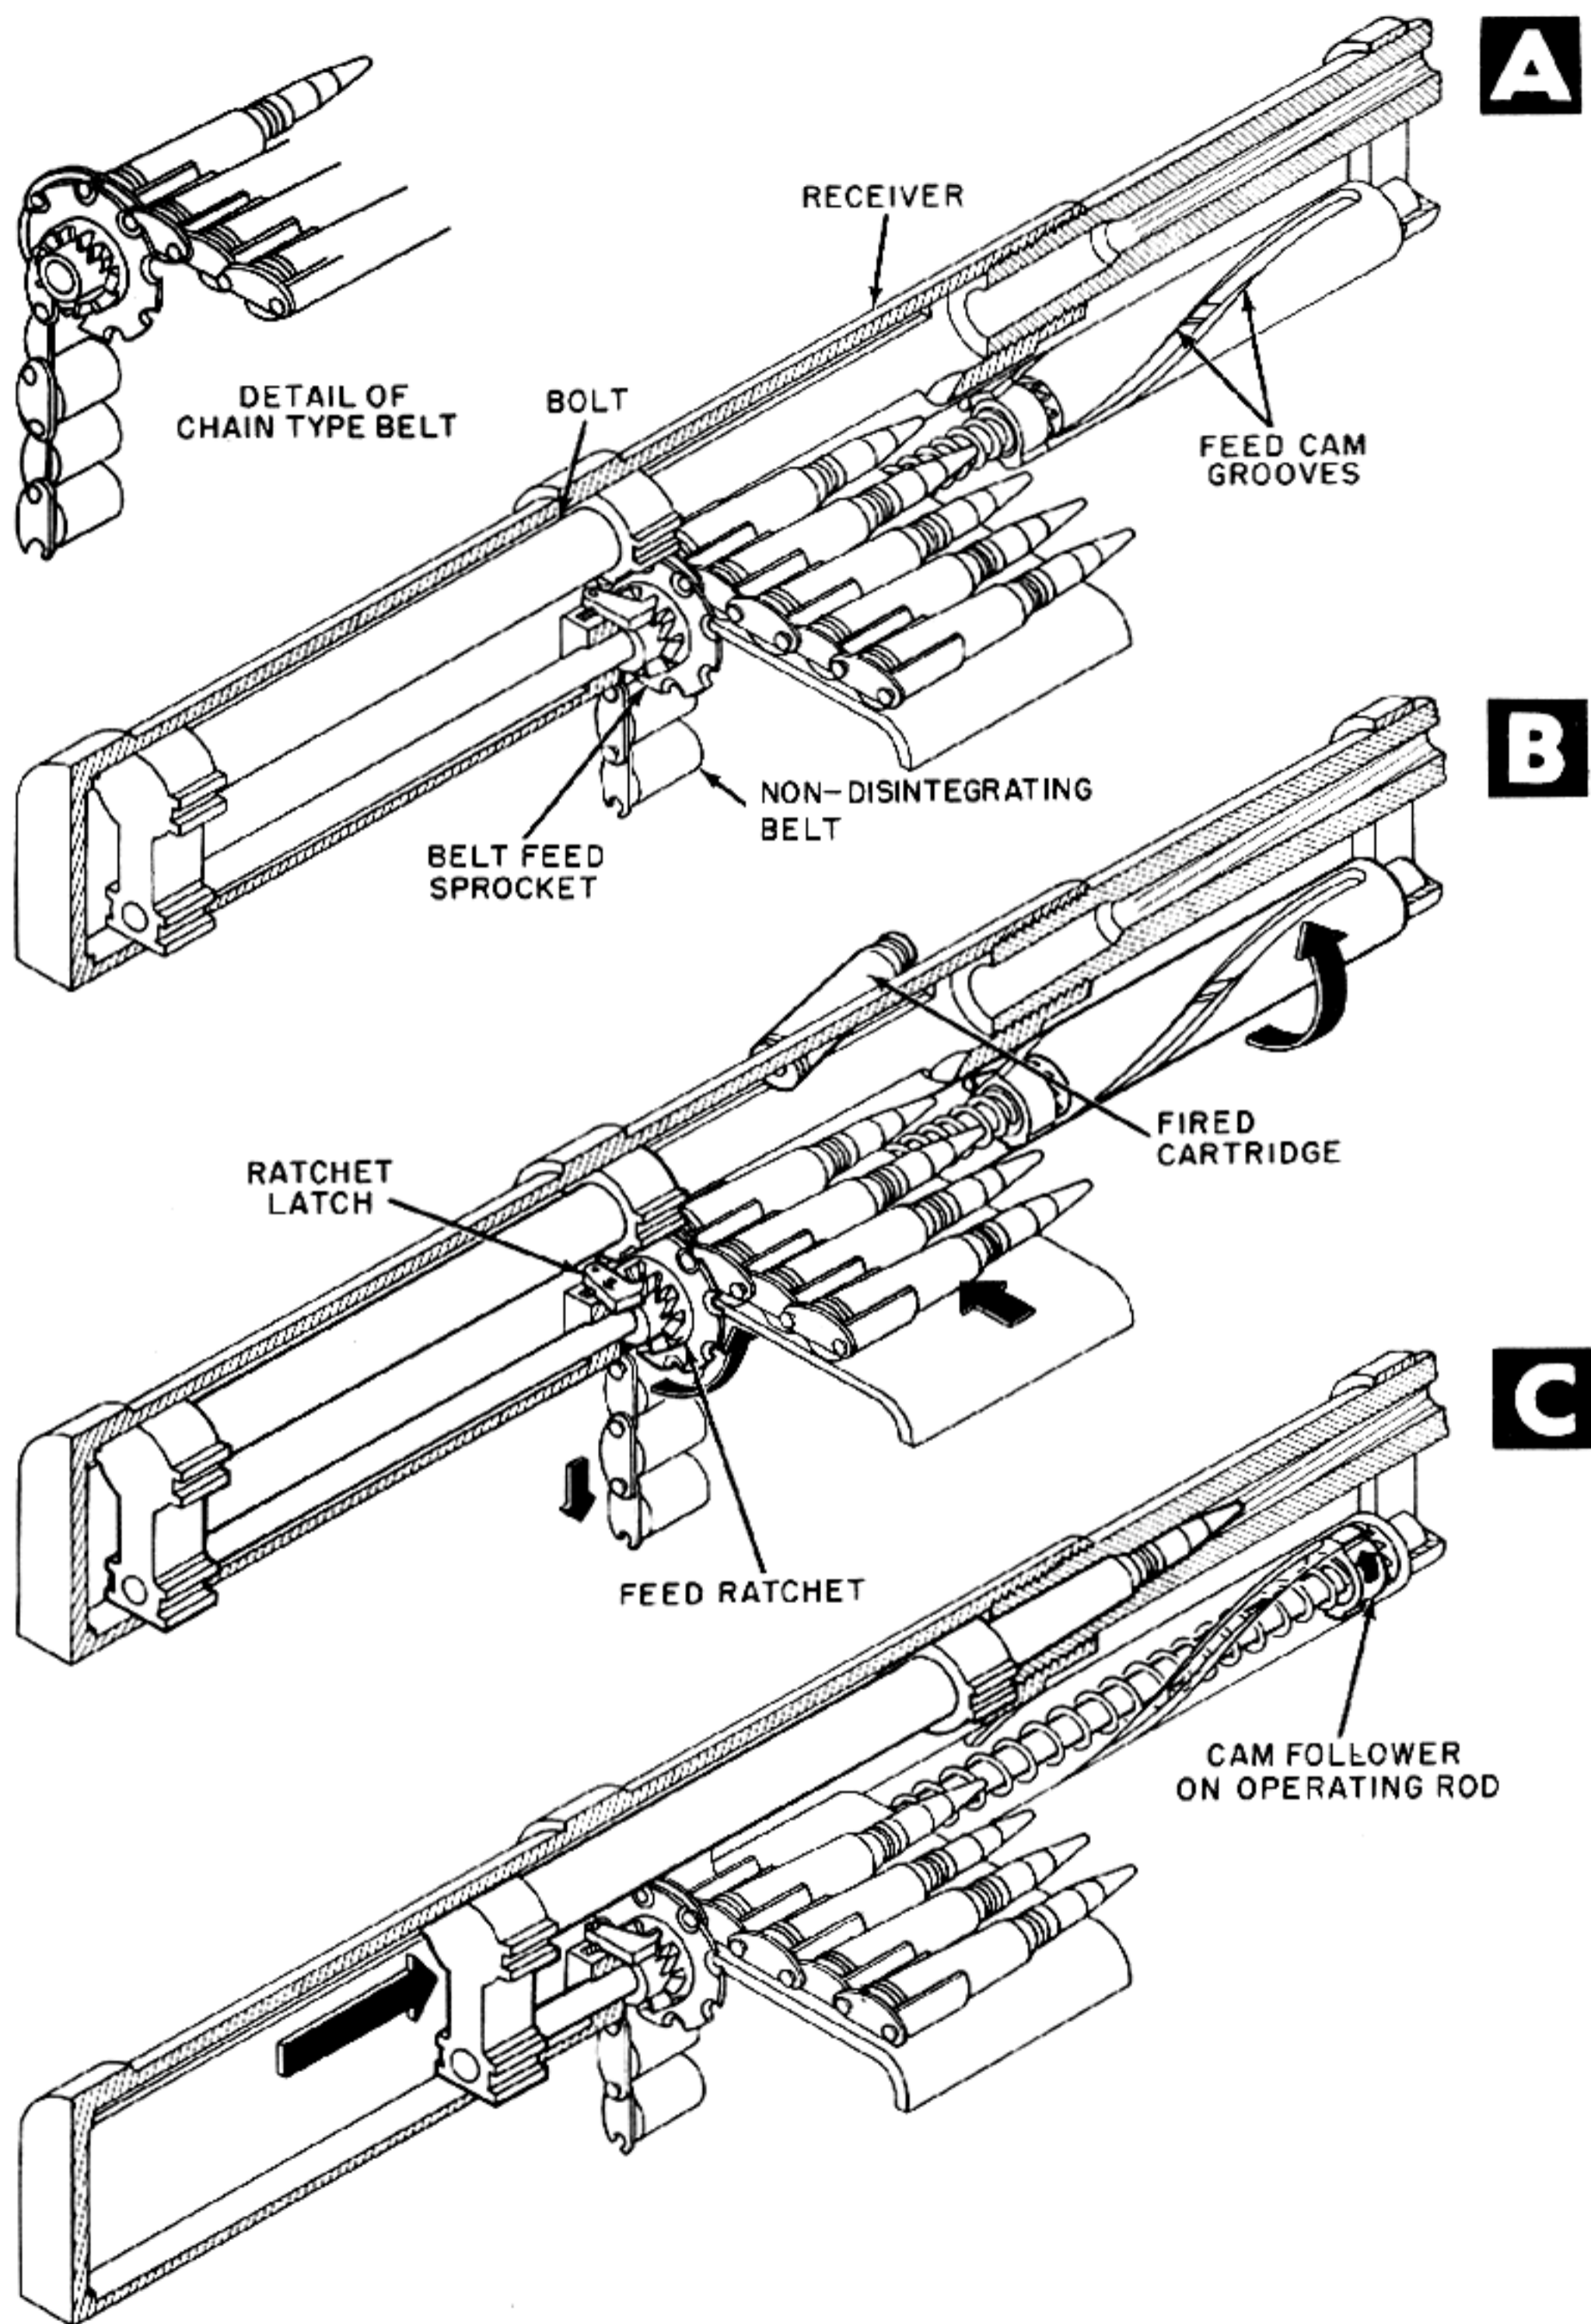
Rotating Sprocket Actuates Bicycle Type Chain Ammunition Belt.
